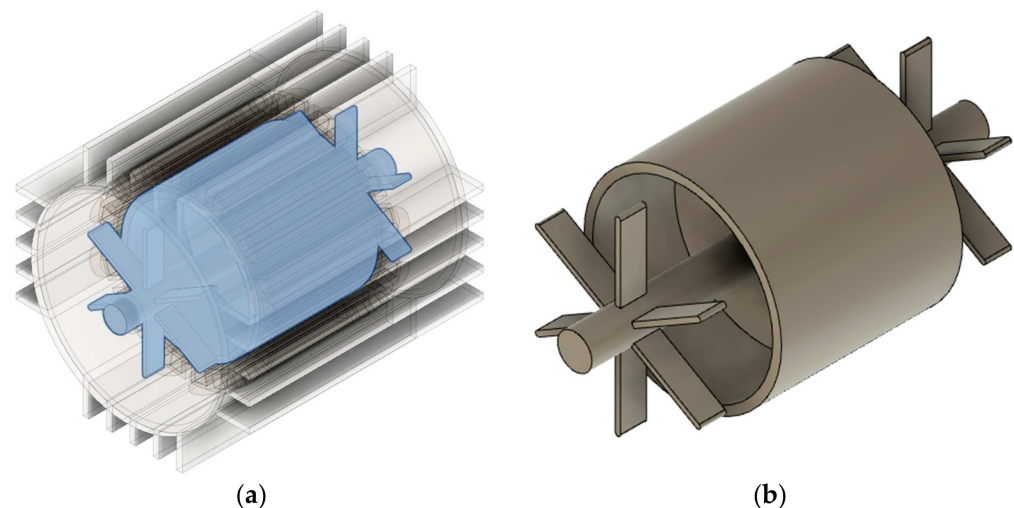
Topology of an EFC machine with inner fan blades. (a) EFC machine with inner fan blades and (b) shaft design.
